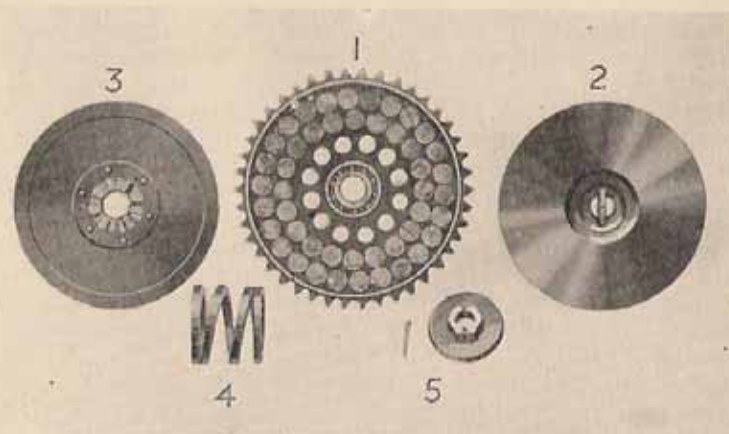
THE 2.48 H.P. AND 3.49 H.P. CLUTCH PARTS
